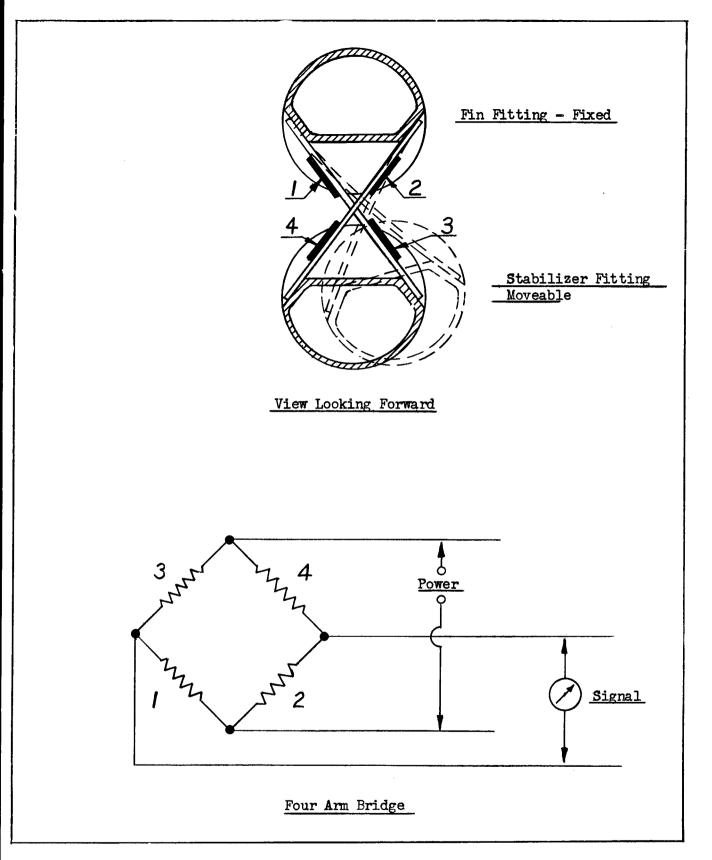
Stabilizer Rocking Fitting Strain Gage Installation
